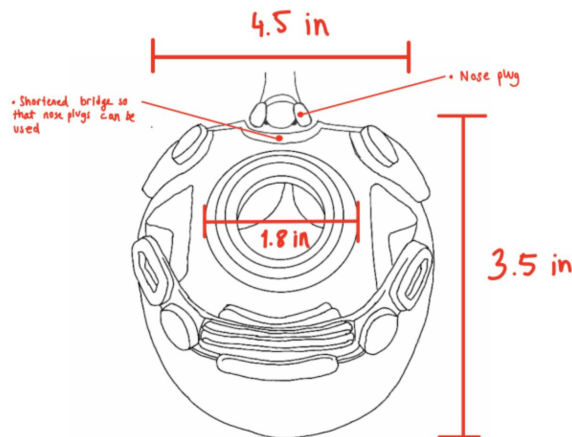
Sketch of the Nose Clip and Mouthpiece design.
